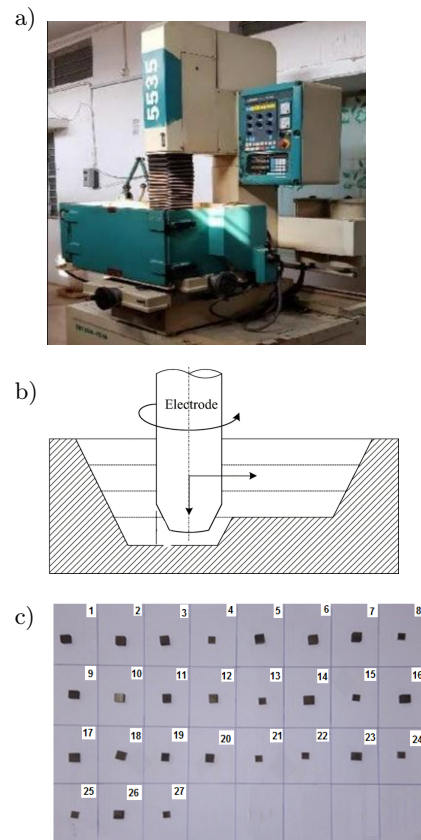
Electronica Elektra Plus (a) EDM with rotary tool setup, (b) electrode rotary tool, (c) tungsten carbide workpieces after machining
